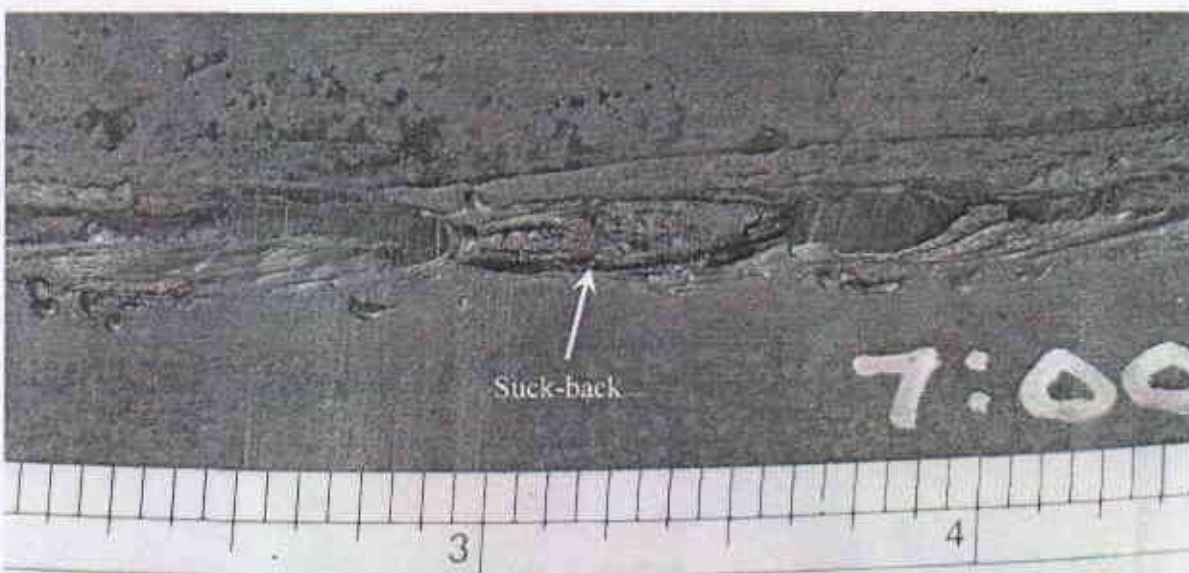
Photograph of root of girth weld in Sample 1. "Suck-back" is clearly visible. Scale divisions are 1/16th inch.
